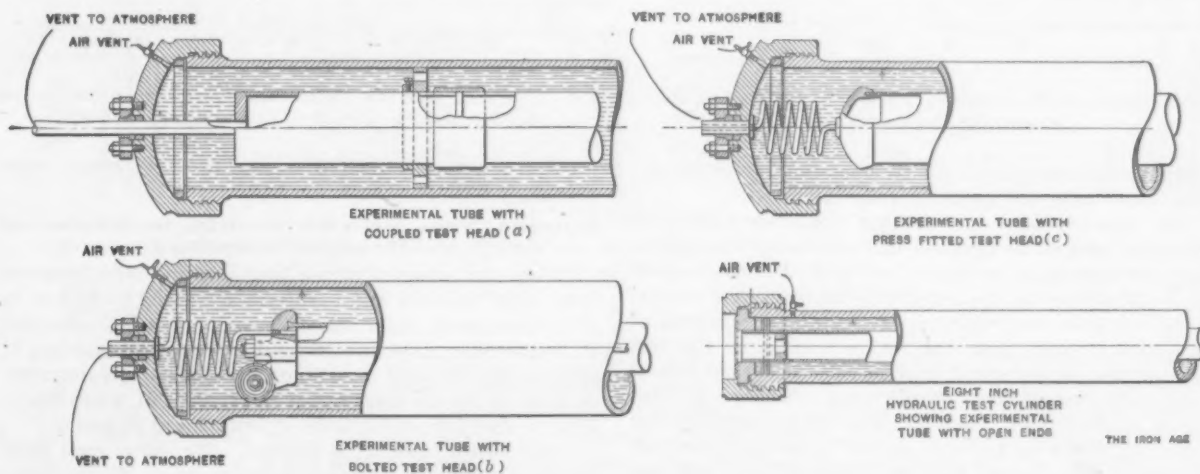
Hydraulic Test Cylinders Showing Experimental Tubes in Position.
